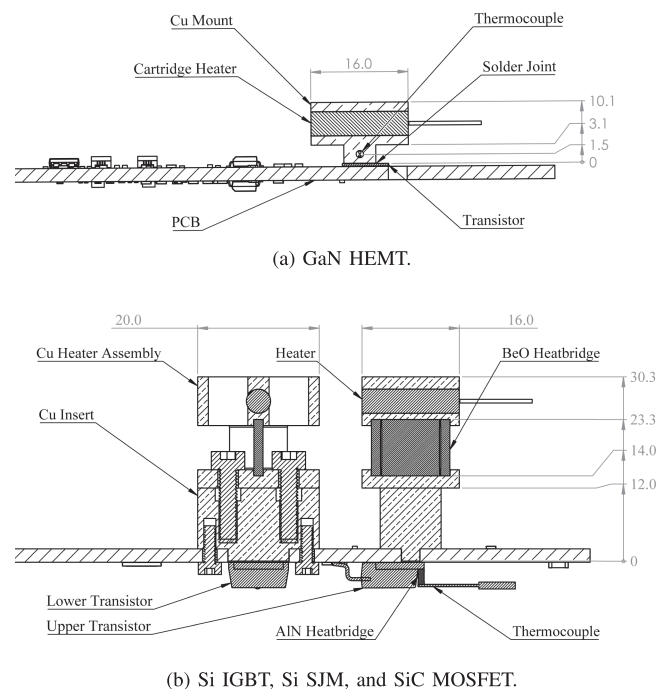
Heater block and thermocouple assemblies for different transistor types (dimensions in mm).
